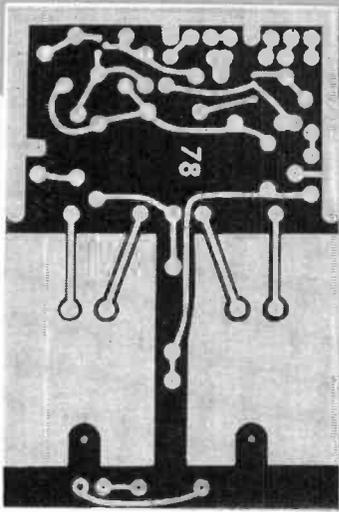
You'll find construction a "snap" if you use the special printed-circuit board. Heat sinks for power transistors Q3 and Q4 can be cut out from an old aluminum chassis.
